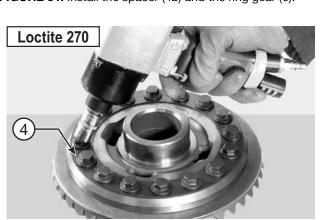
Mount the ring gear (6) and fasten it to the differential box with screws (4).
